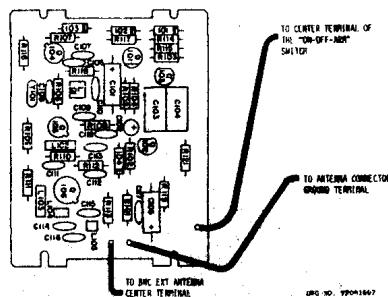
PRINTED CIRCUIT BOARD CONNECTIONS
